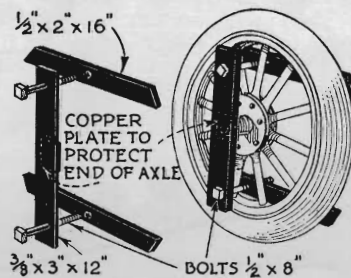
Wheel puller made of iron bars, a piece of copper plate and two heavy bolts
